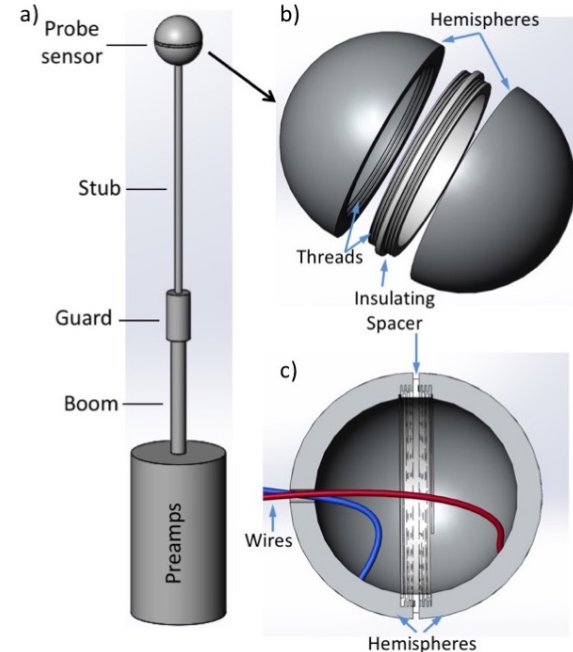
a) Overview of a prototype DHP system; b) Exploded view of two hemispheres and an insulating spacer; c) Cross-section of the assembled DHP sensor with two wires connecting to each hemisphere.
